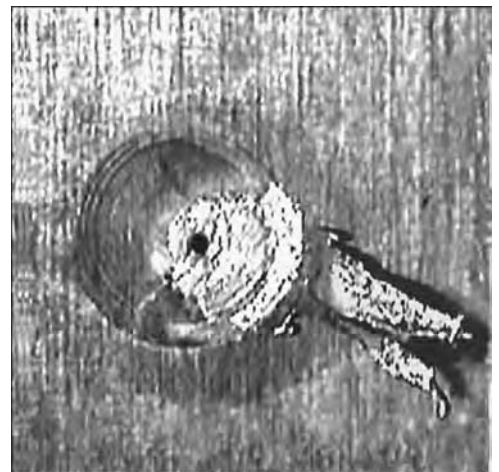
Surface expulsion of an AA5754 weld. Source: Ref 2
